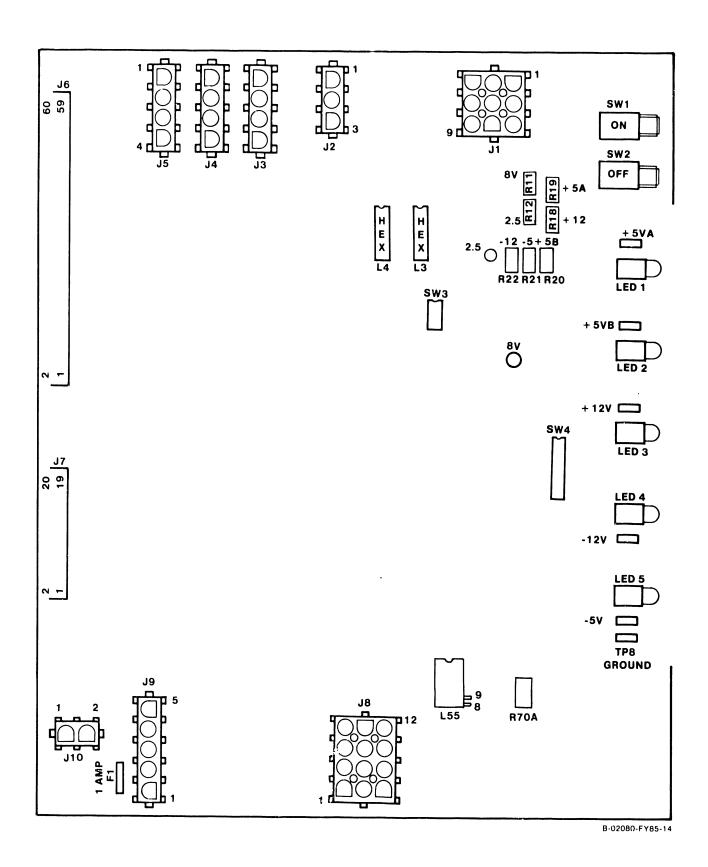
Power Supply Controller Board. (Rev. 0 Version)
